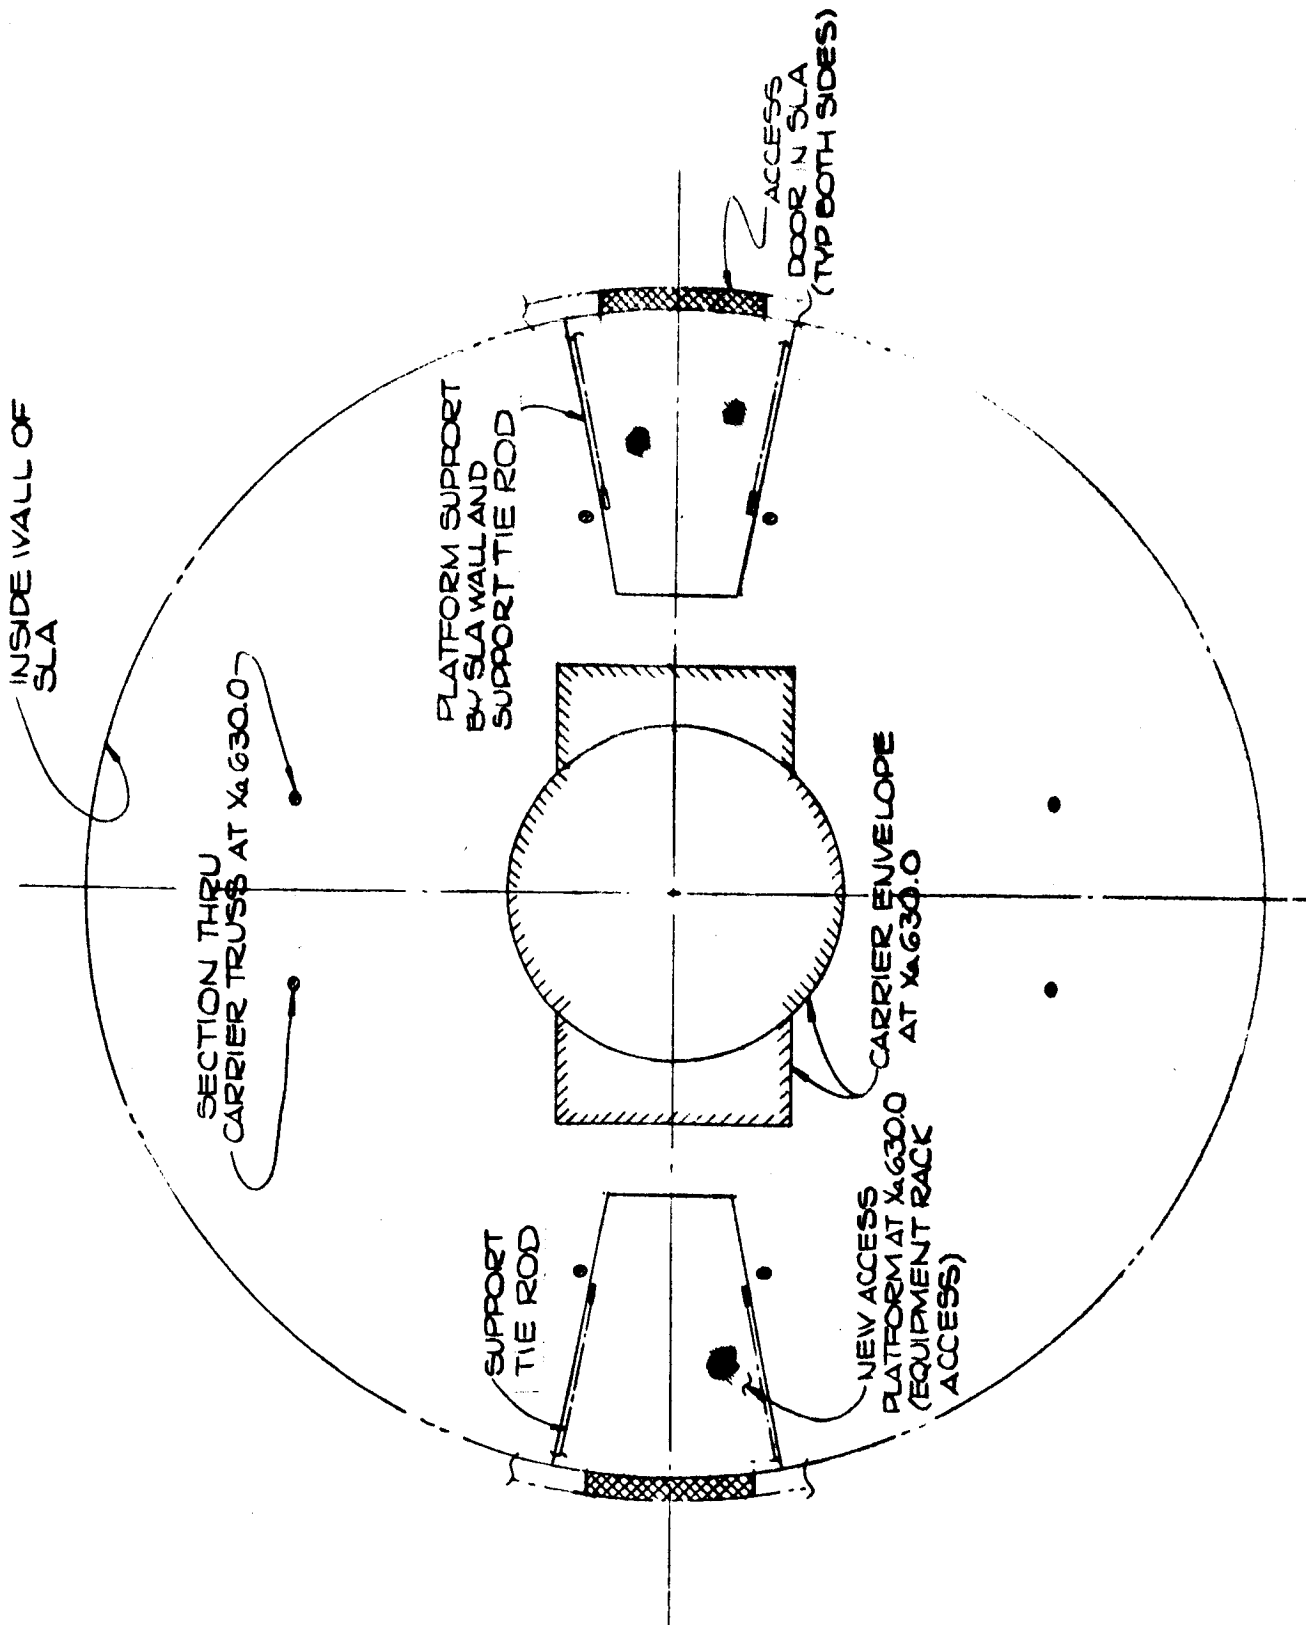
SLA Internal Access - Plan View, Level X_A 630
